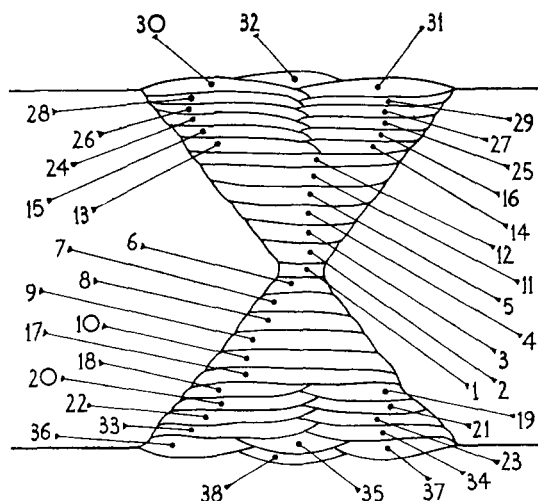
ILLUSTRATING SEQUENCE OF RUNS ACROSS SECTION THROUGH A BLOCK WELD
